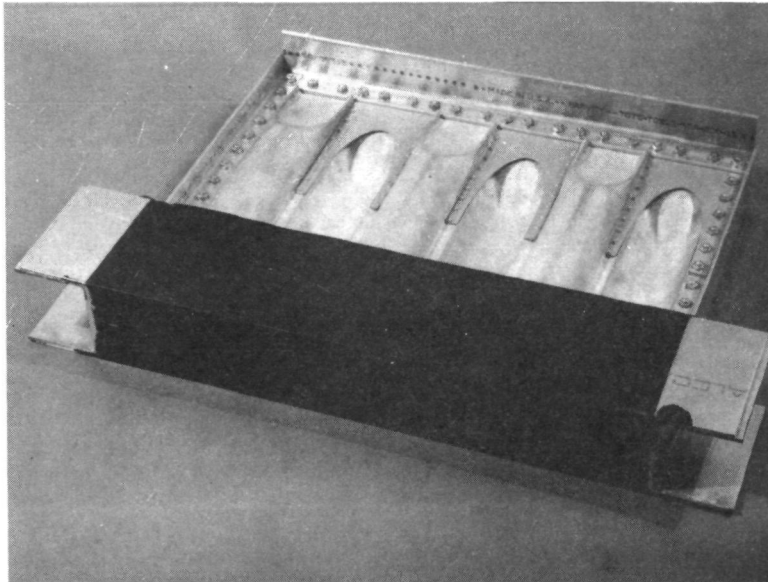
SINGLE SHEET END CLOSURE SHEAR TEST SPECIMEN
